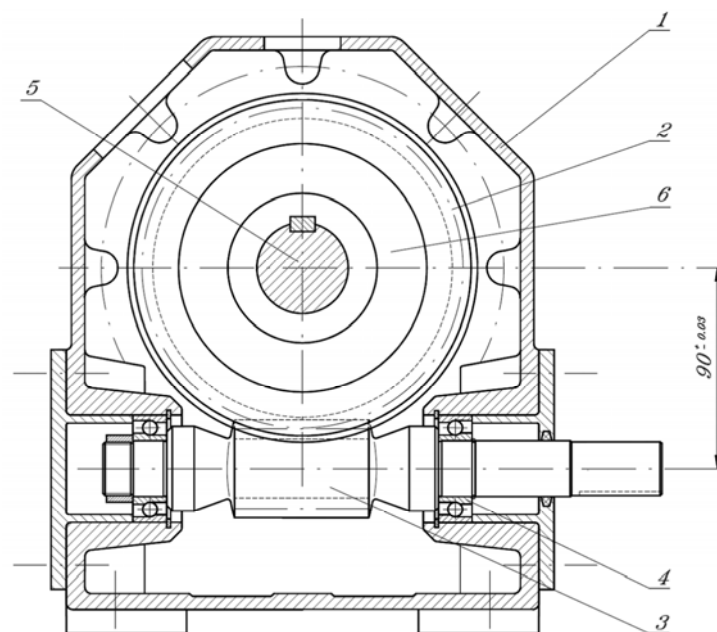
Cross-section of the test gearbox : 1 - Housing, 2 - Worm wheel, 3 - Worm, 4 - Rolling bearing, 5 – Output shaft, 6 - Worm wheel hub
